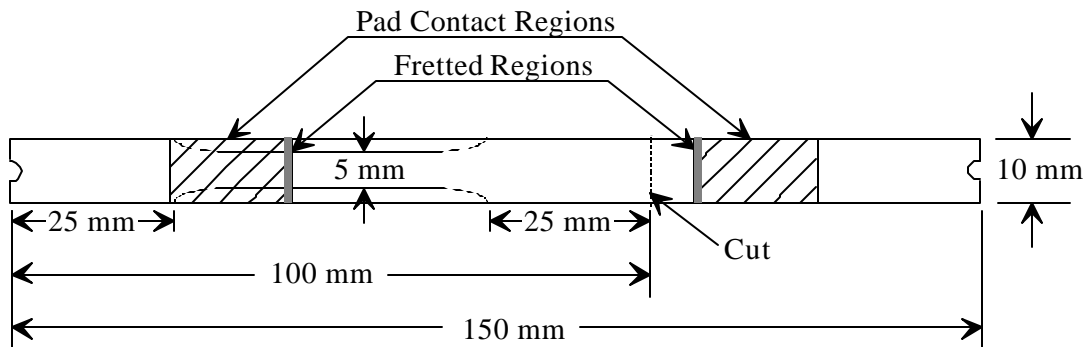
Machining schematic for samples subjected to prior fretting fatigue damage.
